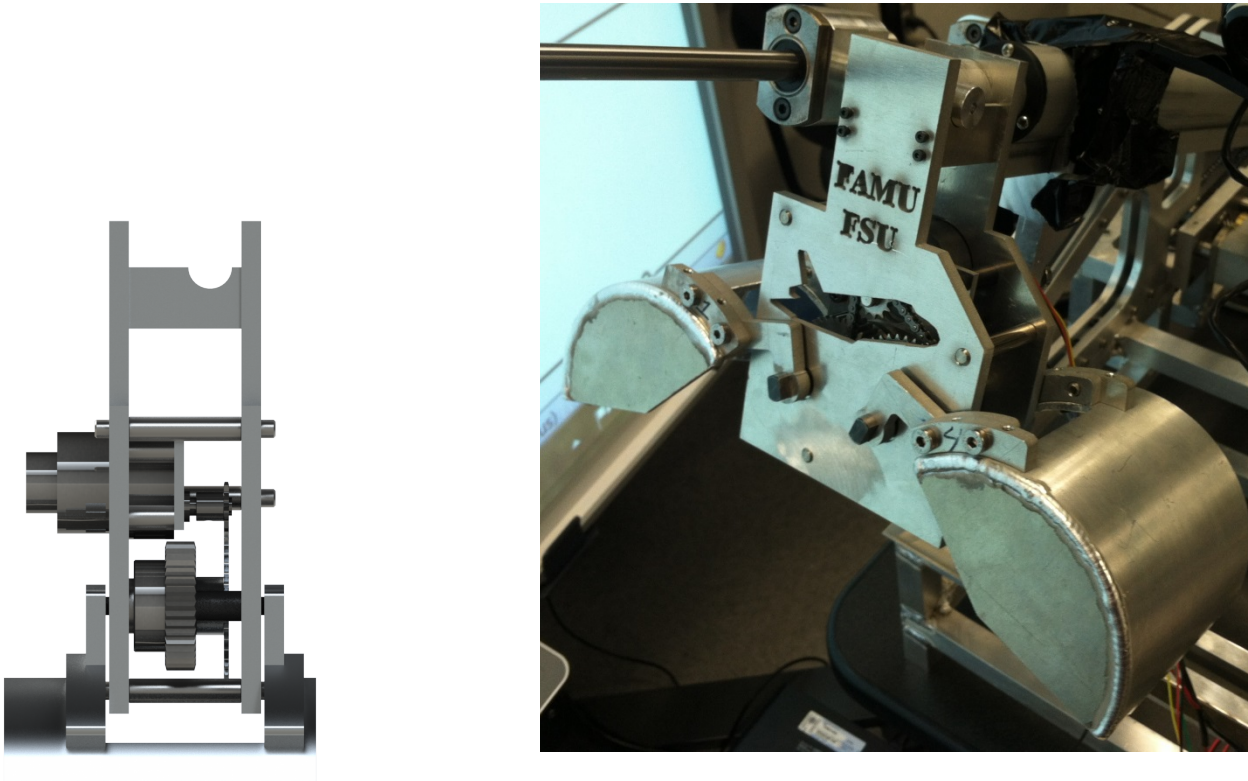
CAD view of finalized gripper profile view depicting chain drive and gear train (left). Photo of the gripper in the open position (right).
